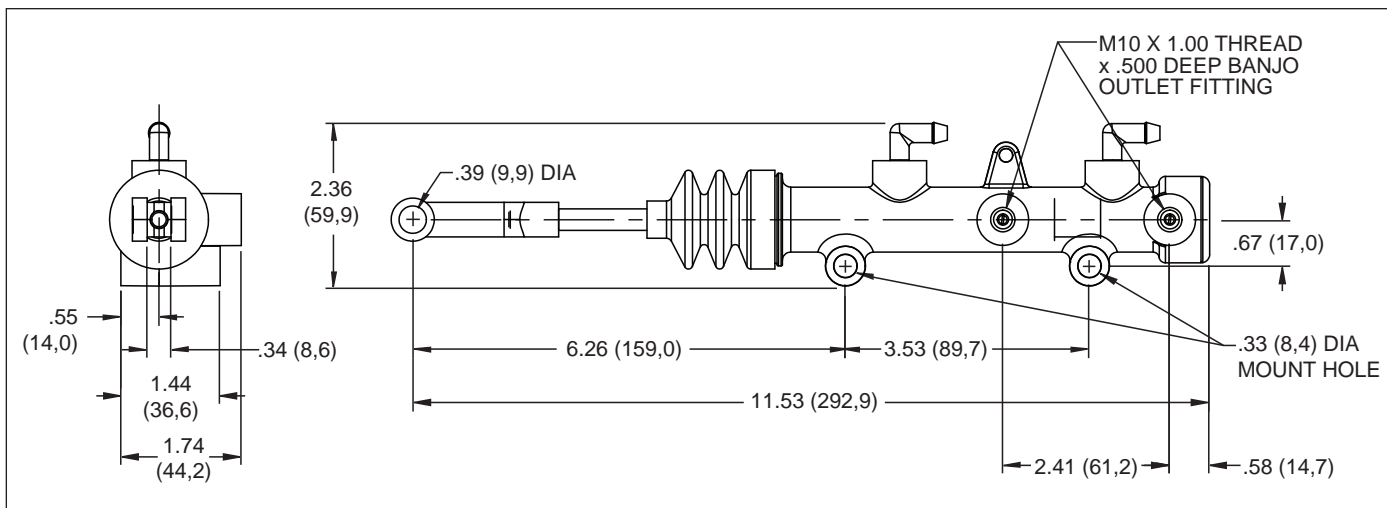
Wilwood 5/8" TM1 Tandem Master Cylinder, Mounting Dimensions
